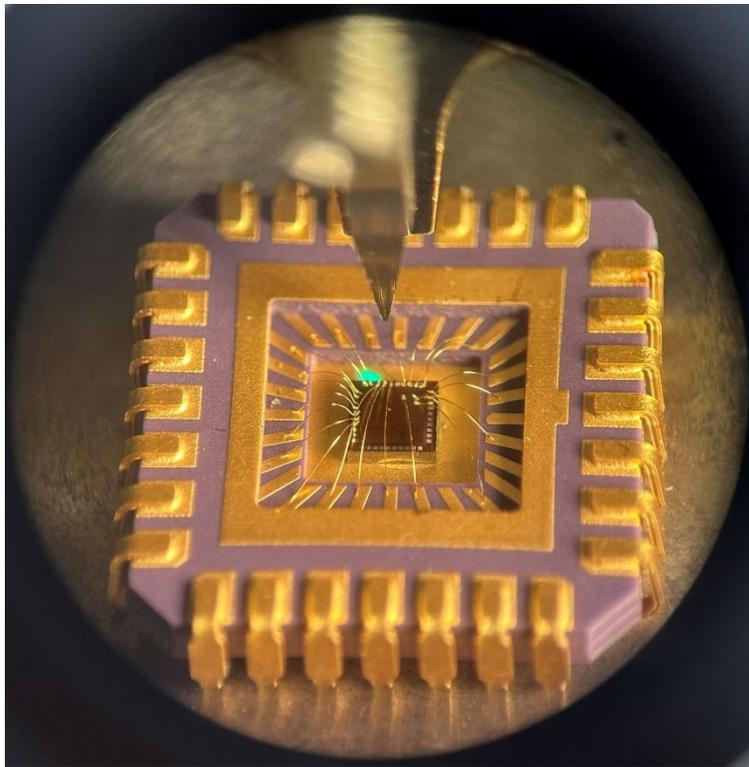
PDC1 chip wirebonded to CQFJ-28 package
